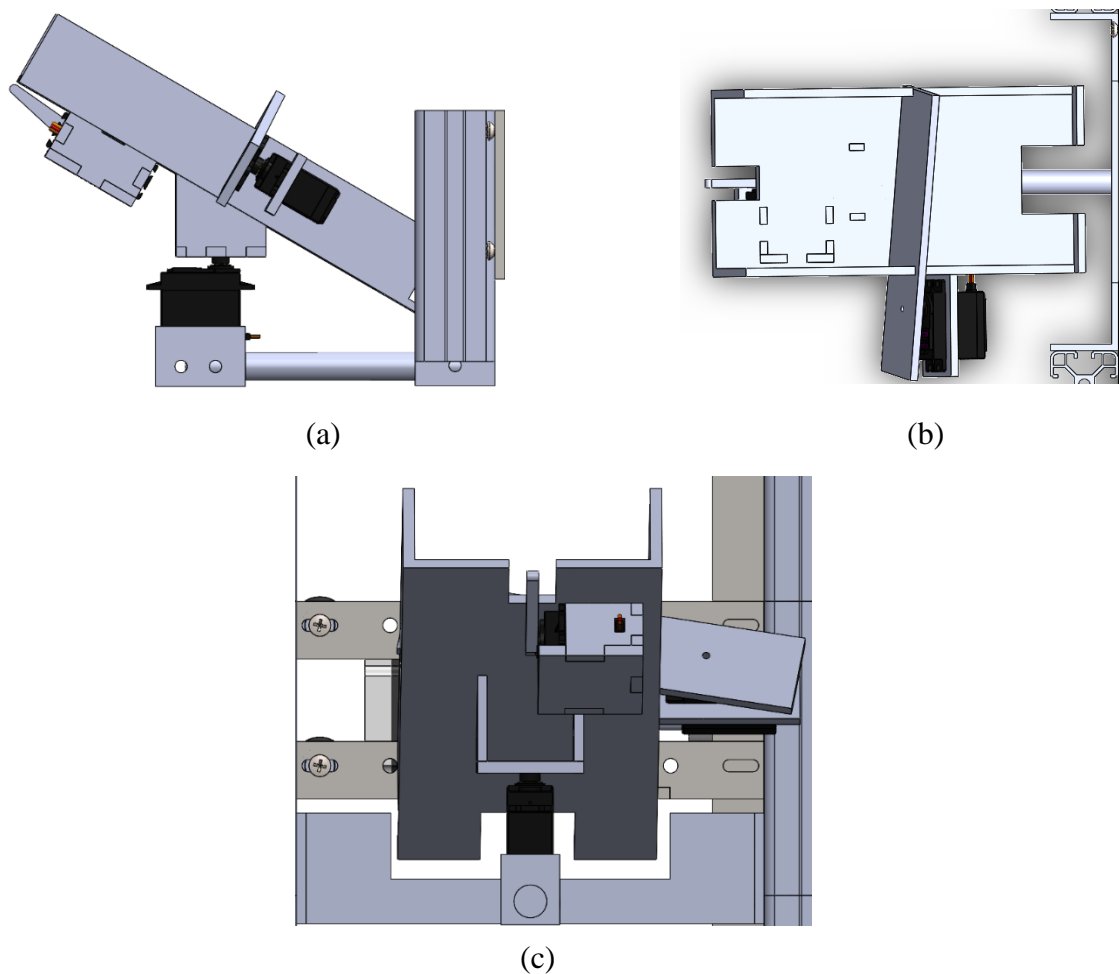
End Effector Assembly, (a) Side View, (b) Top View, and (c) Front View
